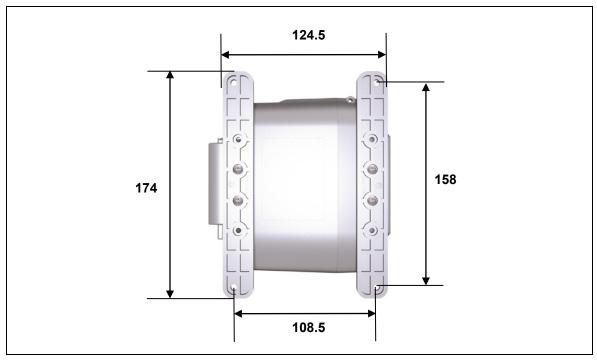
Mounting dimensions of the adapter. View from below (in mm)
